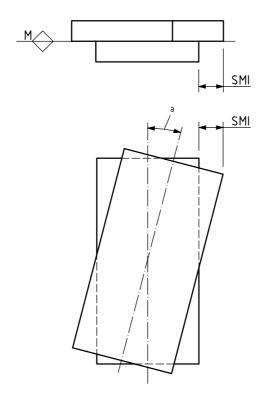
Surface mismatch (SMI) caused by dimensional mismatch between two mating mould components
